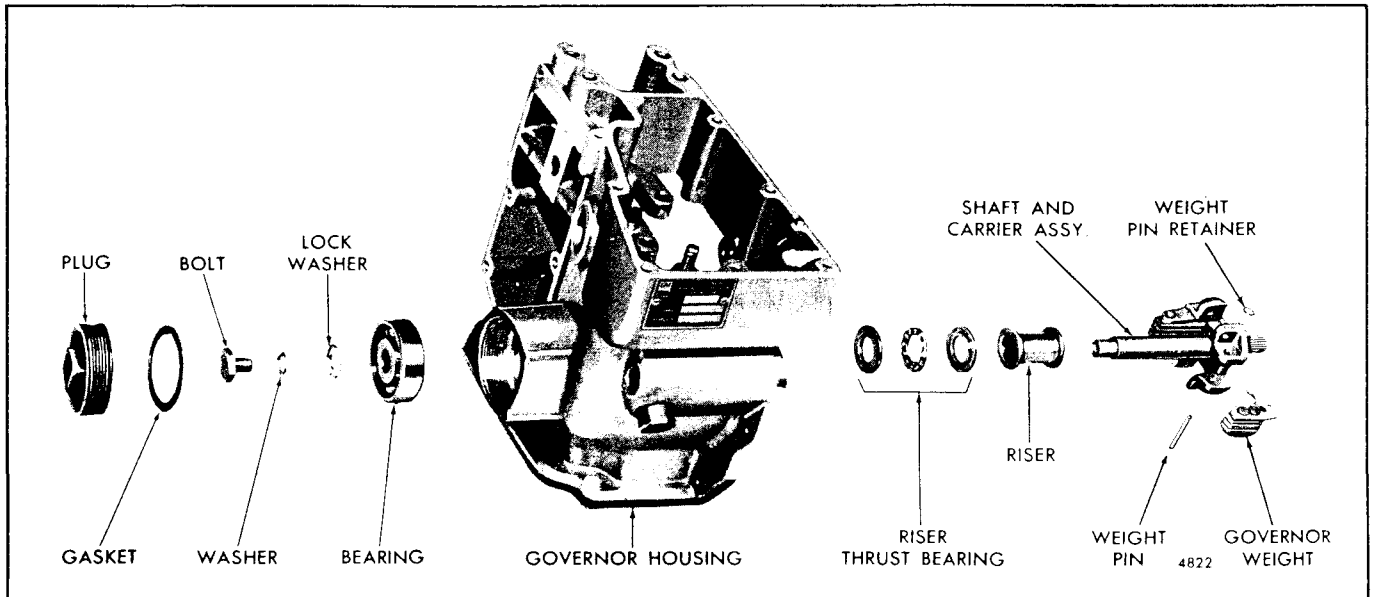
Governor Housing and Weight Details and Relative Location of Parts
